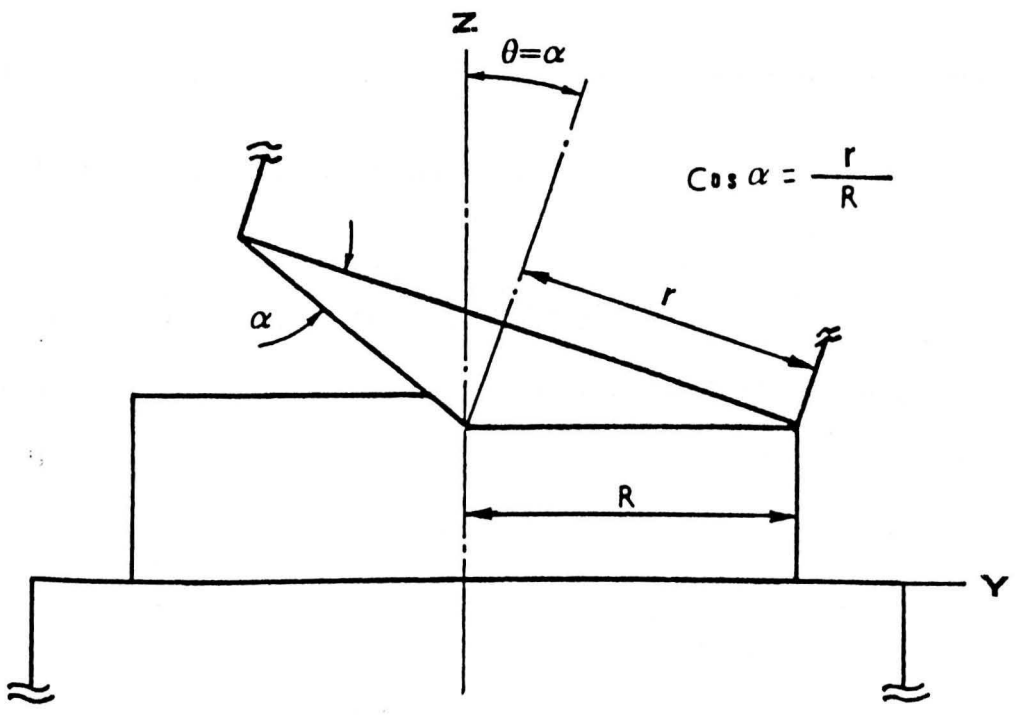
Tool/workpiece arrangement in a precession type machine
